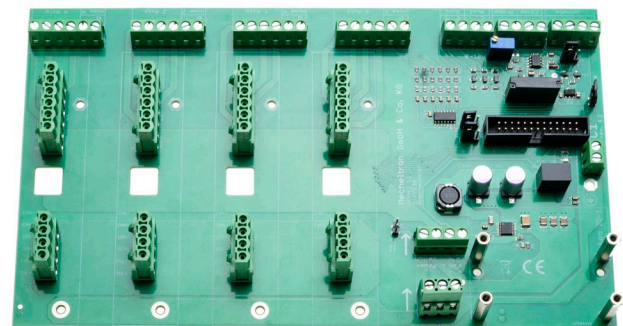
Motherboard, the prepared space for the adapter module at the bottom right
